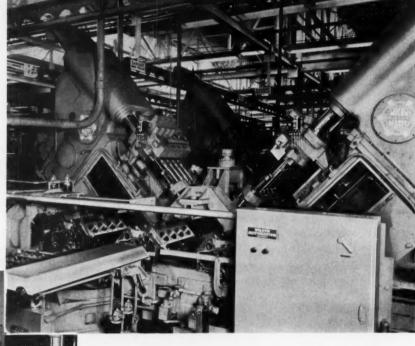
(Left) Swinging transfer arm alternately unloads pair of crank bearing honing machines and carries V-8 engine blocks to bearing and bore inspection unit.
